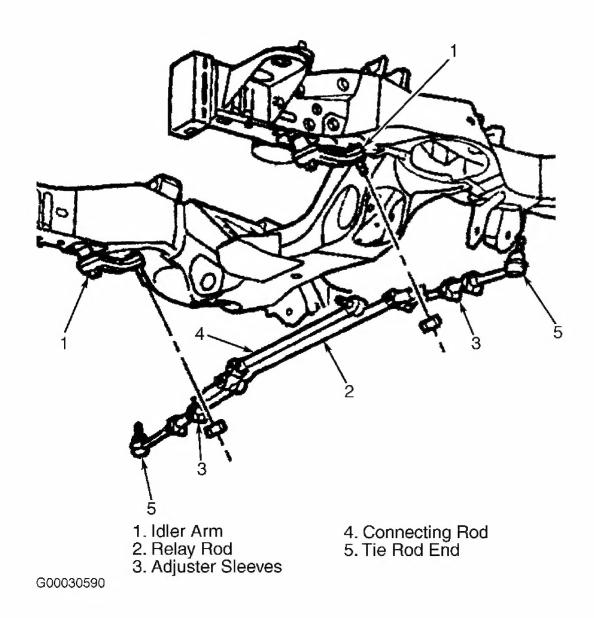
Exploded View Of Steering Linkage ("G" Series) Courtesy of GENERAL MOTORS CORP.
